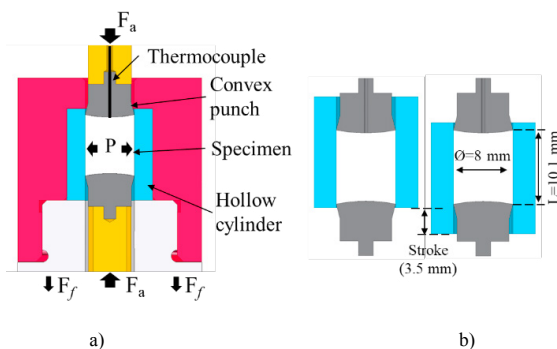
Schema of axial friction test. (a) General assembly; (b) relative position of specimen and hollow cylinder before and after stroke.
